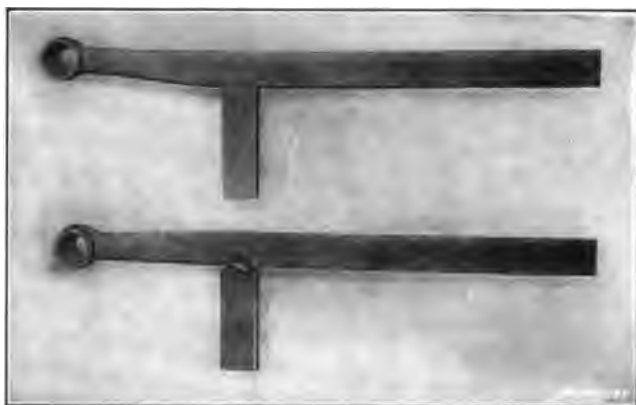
Example of Tee-welding on Rectangular Work performed on Butt-welding Machine with Special Arrangement of Clamping Jaws
